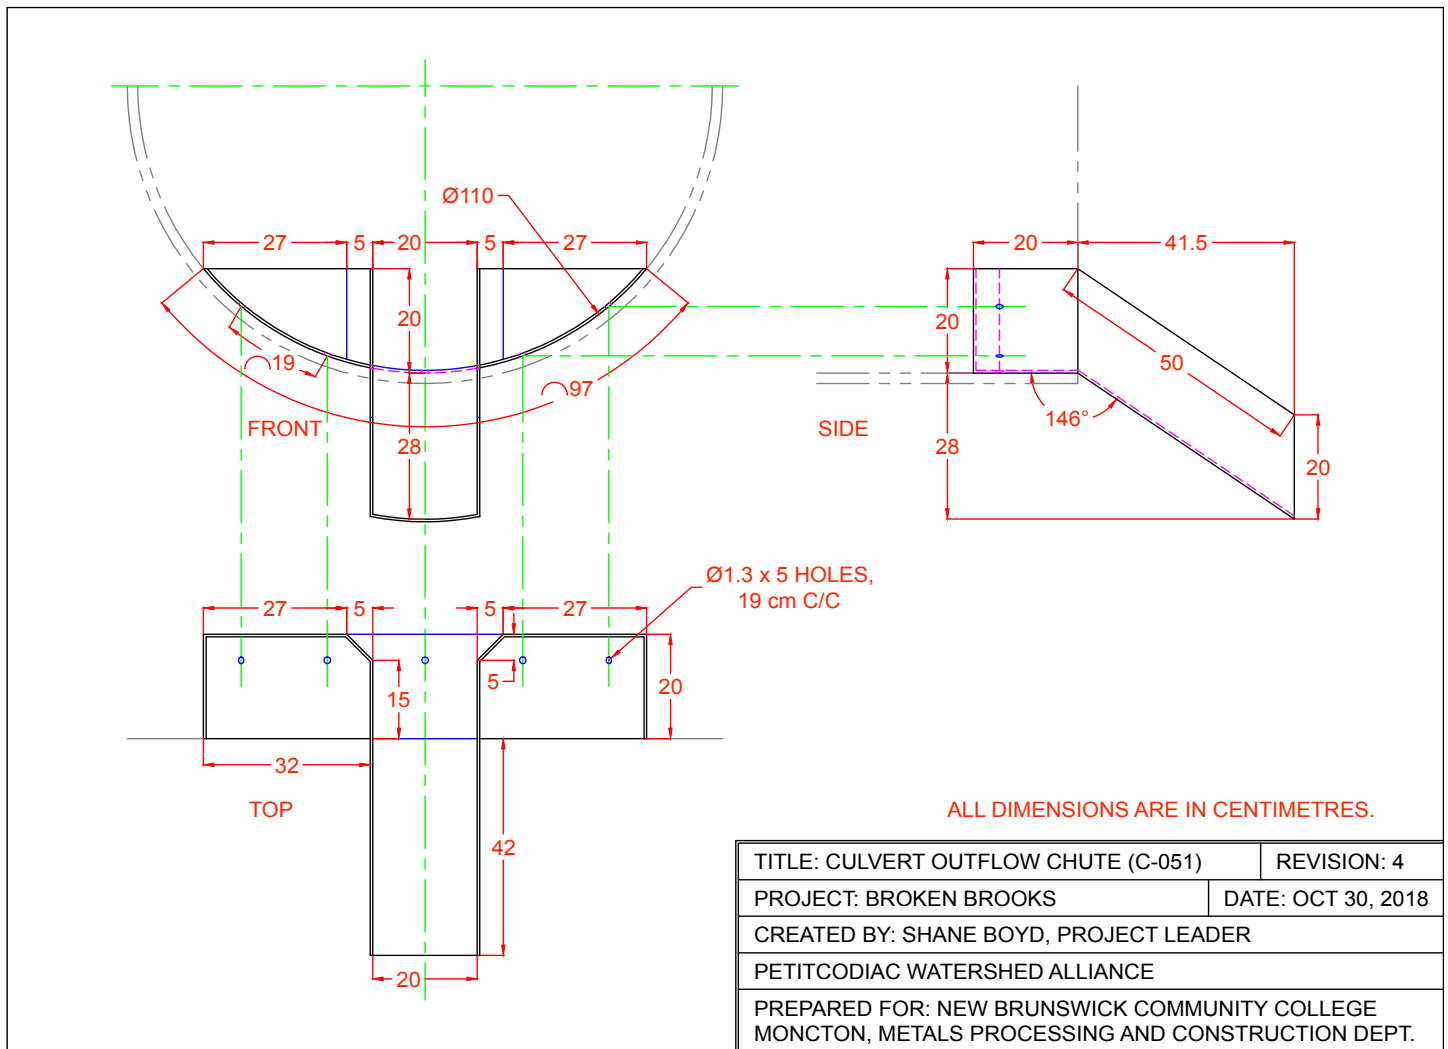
Front, top, and side views with dimensions of outflow chute for culvert C-051
